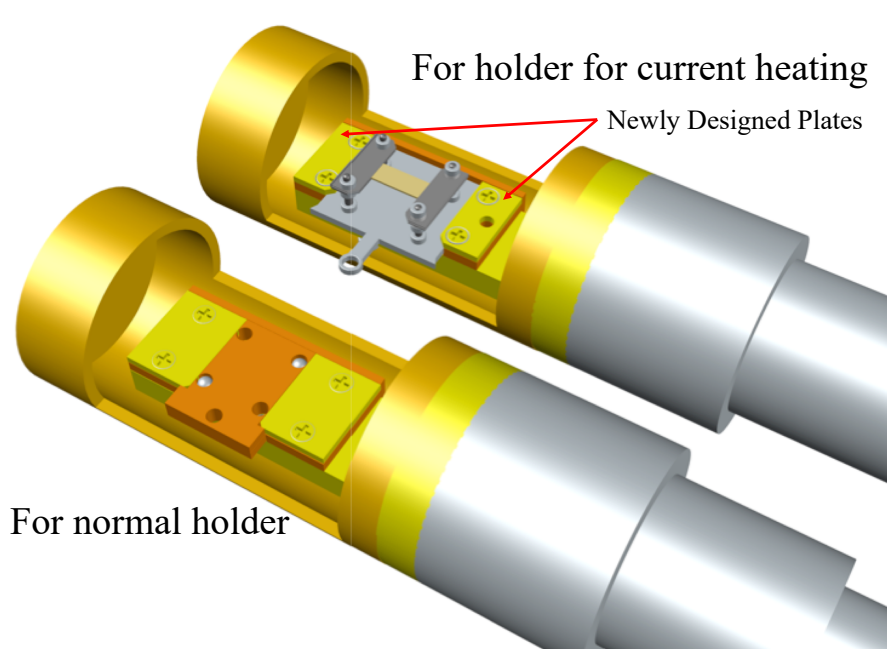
Schematic drawing of the head on the manipulator with the helium cryostat.
